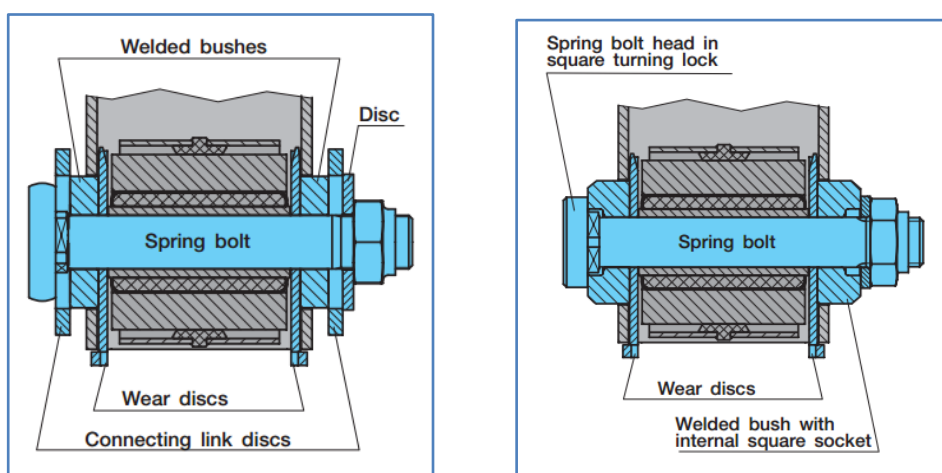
Adjustable hanger bracket pivot bolt assembly (Left) and Fixed hanger bracket pivot bolt assembly (Right)
